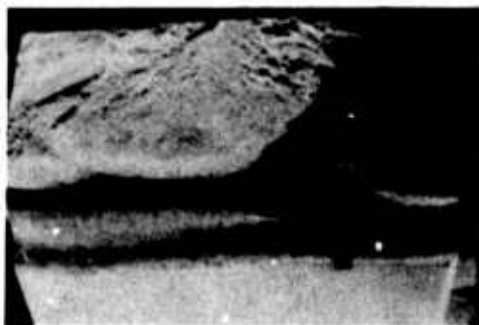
Fracture surfaces of specimen 3-3, showing fracture origin at seeded 125 μ m (0.005 inch) high density (tungsten carbide) inclusion.
